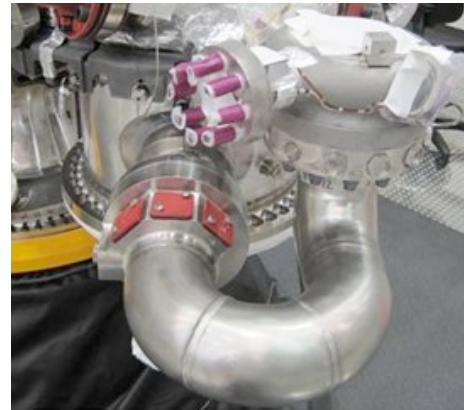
Gas Generator Discharge U-Duct on the J-2X Engine. Note the TIG welds at 60° angles to piece together the full U-tube.
